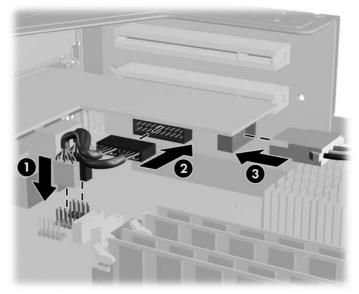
Connecting System Board and Power Cables to the USB PlusPower Expansion Card
